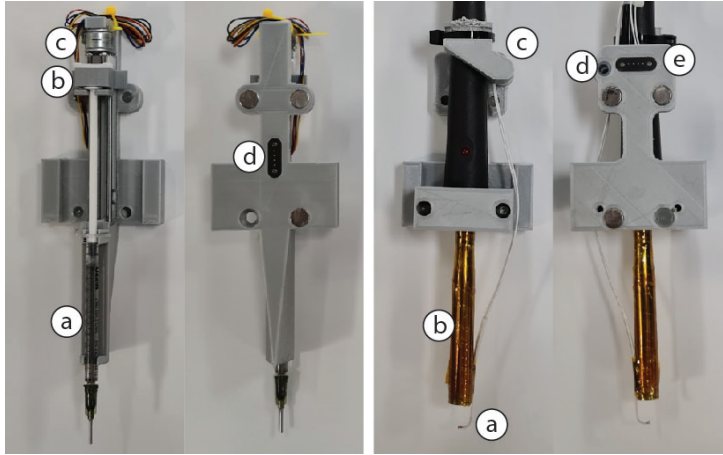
Two of our tools integral to the printing process. *Left:* The syringe depositor tool consisting of a syringe with an attached tip (a), a coupler connecting the stepper motor with the syringe (b) a small linear stepper motor (c) and a magnetic four pin pogo connector (d). *Right:* The heat gun used for curing conductive and electrochromic inks consisting of a thermistor (a), a 12v soldering iron (b), an air connector (c and d), and a magnetic four pin connector (e).
